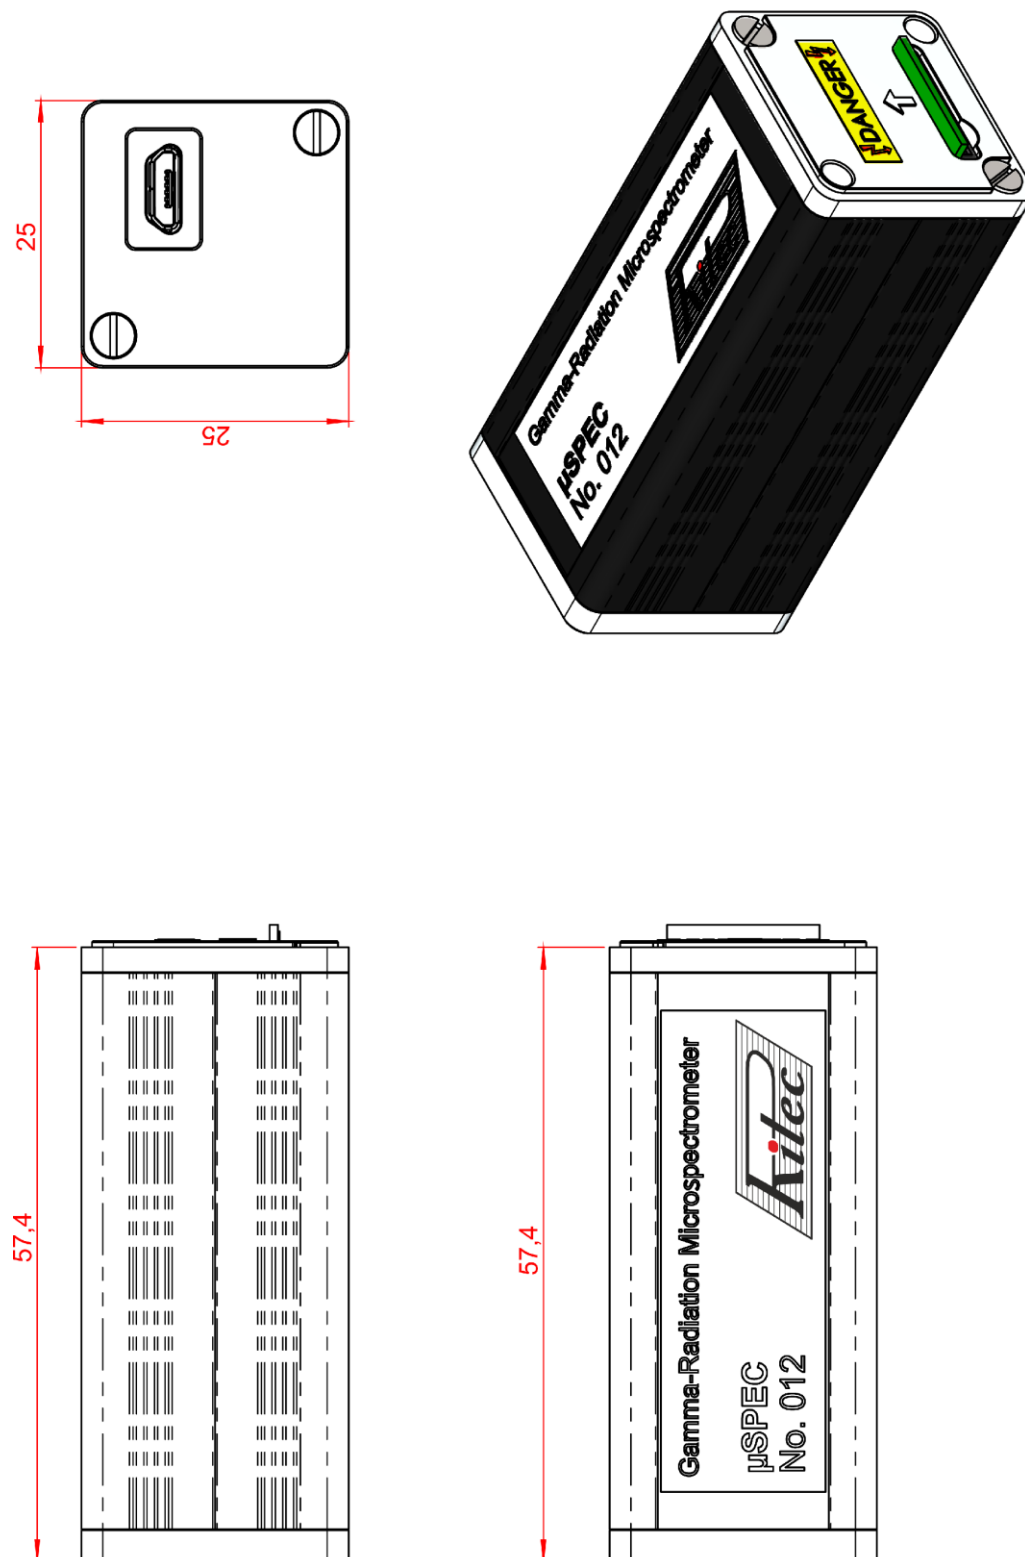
Base Modules μ SPEC / μ SPEC+ outer dimensions.
